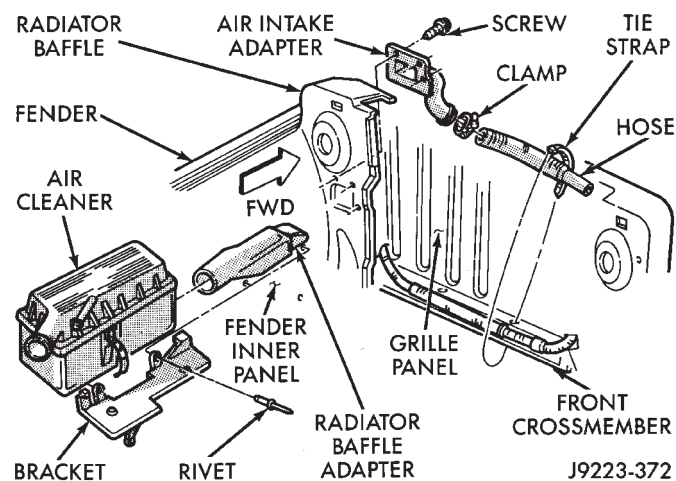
Air Cleaner Housing and Radiator Baffle Adapter Fender
